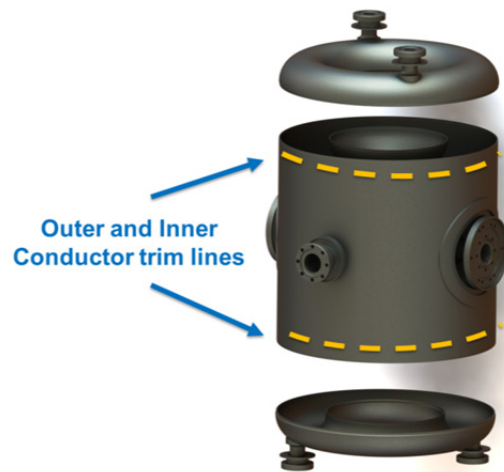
Current method for set frequency of half-wave cavities prior to welding.
